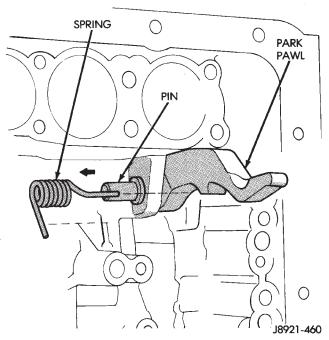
Removing/Installing Park Pawl, Pin And Spring
